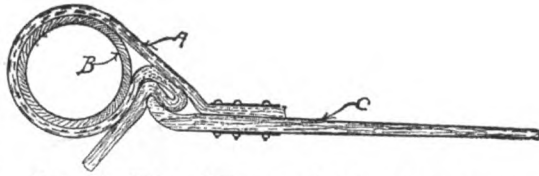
When a Stillson wrench of the right size is lacking, this emergency affair will often make up or loosen refractory unions. B is the pipe; A is a heavy strip of canvas or belting; C is a tough piece of hardwood to which A is firmly bolted.
